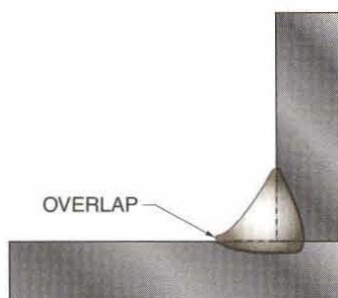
Overlap is a protrusion of weld metal built up beyond the weld toe or the weld root.
